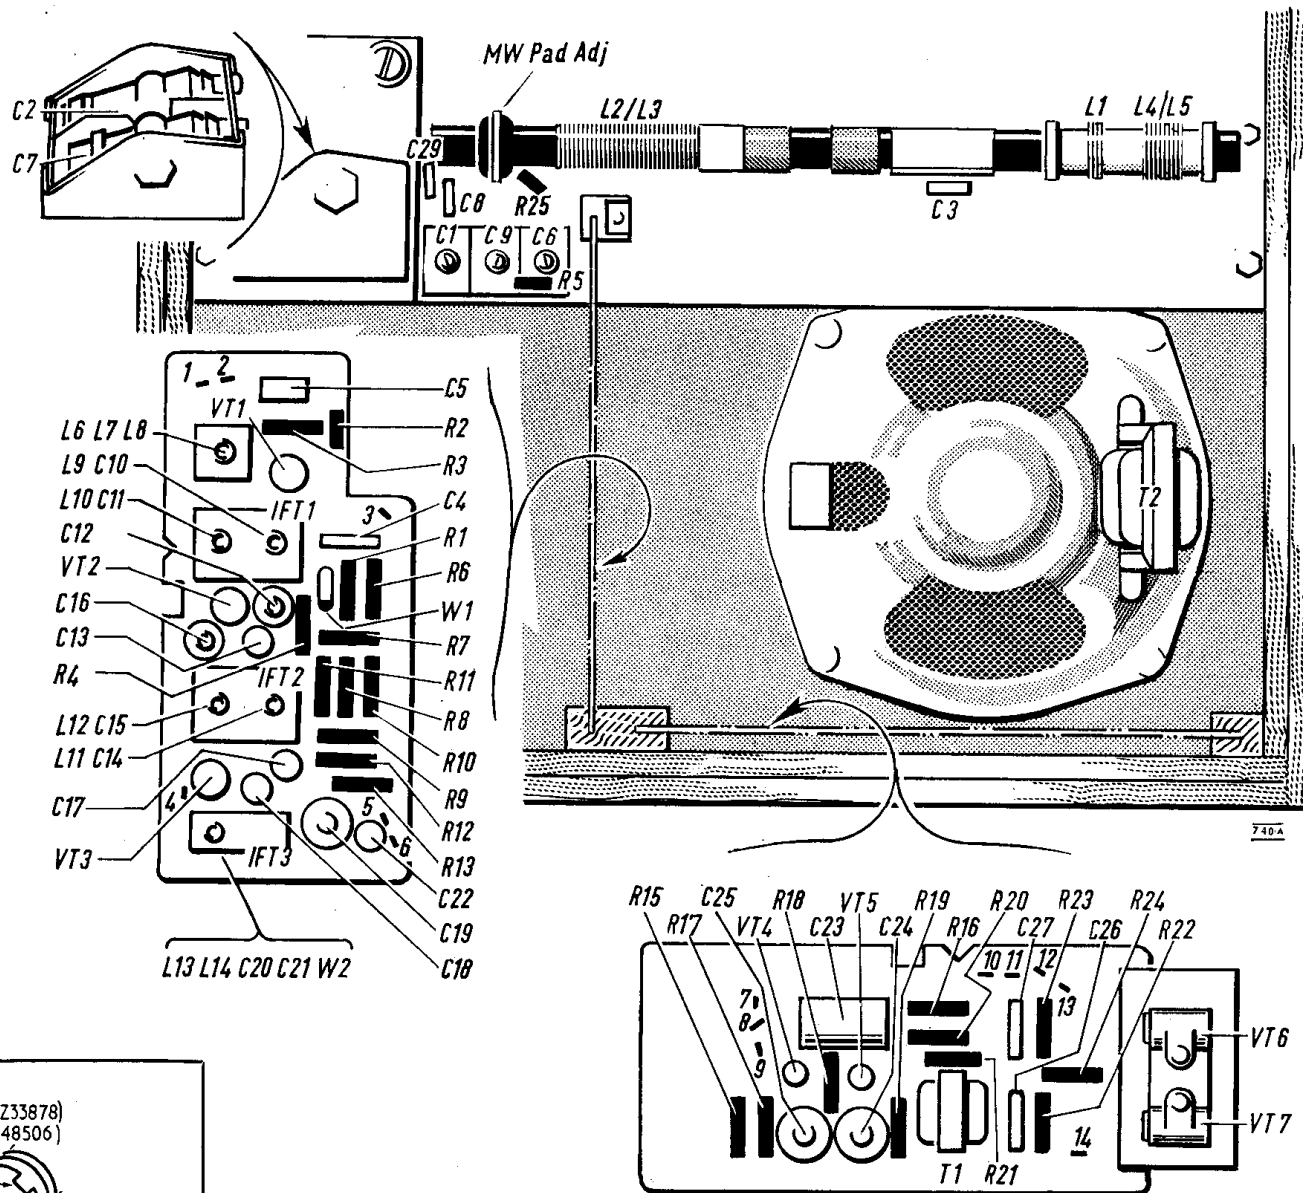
View of the receiver chassis with the printed boards withdrawn from their mountings. VT6 and VT7 are coated with silicone grease to ensure effective heat transfer and are mounted in a heat sink. Also shown are the positions of trimmers and coil adjustments used for alignment.
